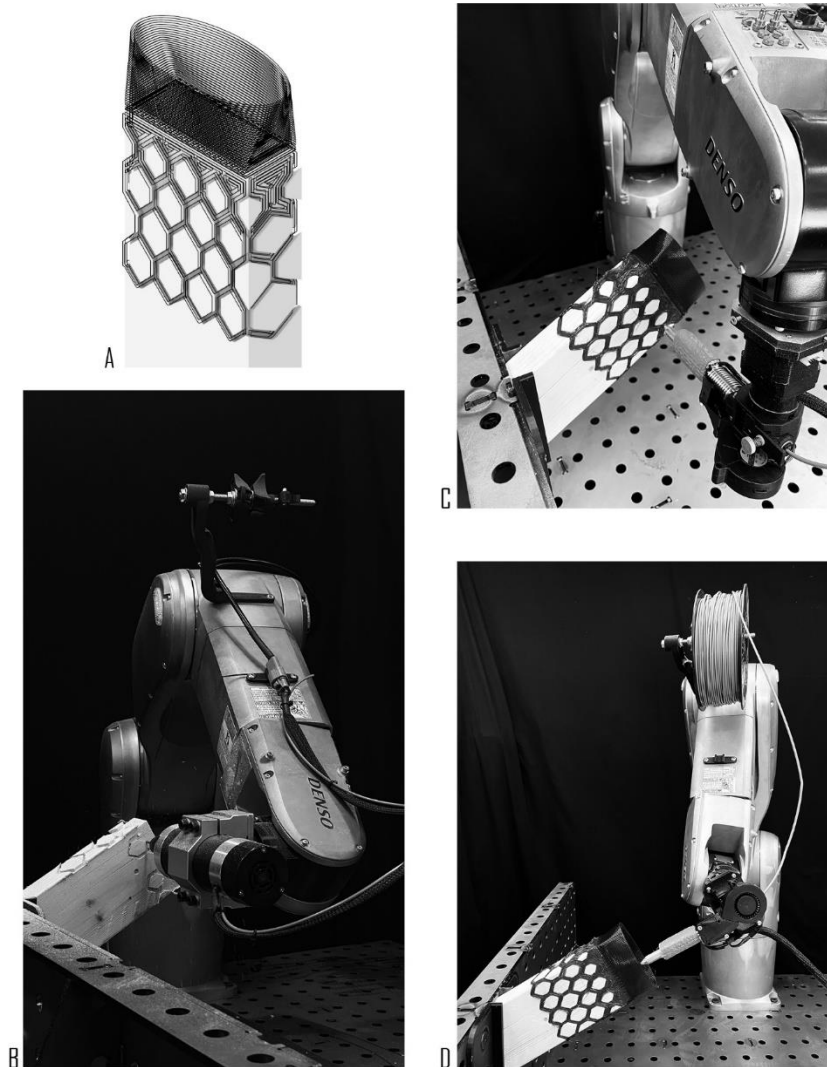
(A) Rhino generated Tool path (B) Robotic CNC Milling hatch. (C) Robotic 3D Printing hatch. (D) Robotic 3D printing.
